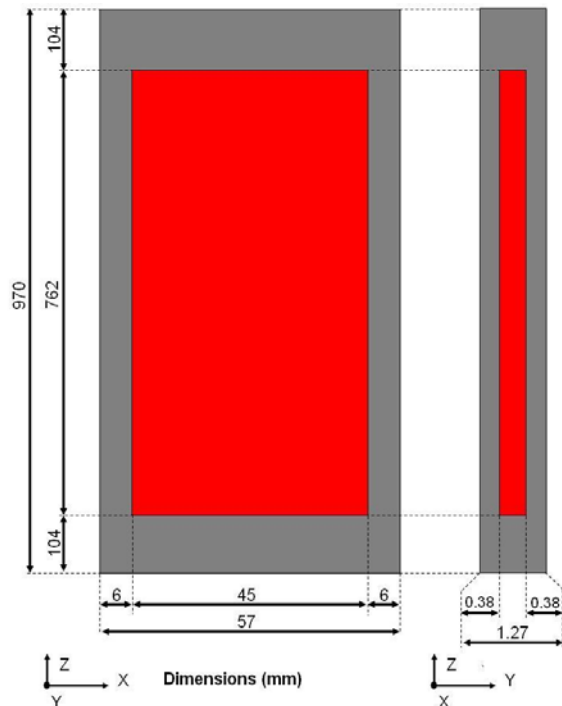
E-FUTURE fuel plate and fuel meat dimensions
